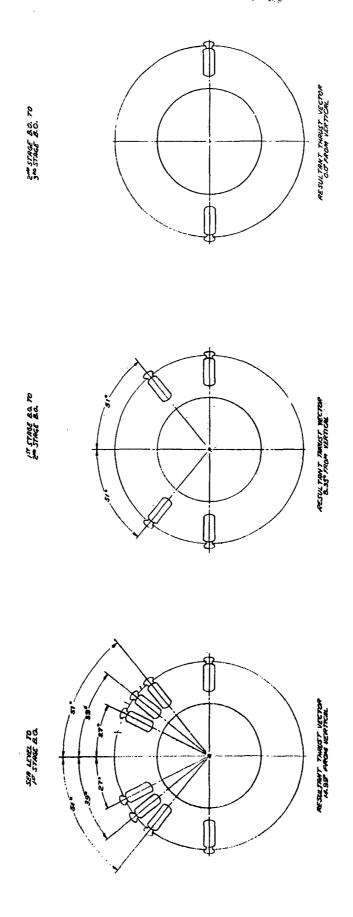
Mounting location of 8 EPD-310 abort motors, top view
